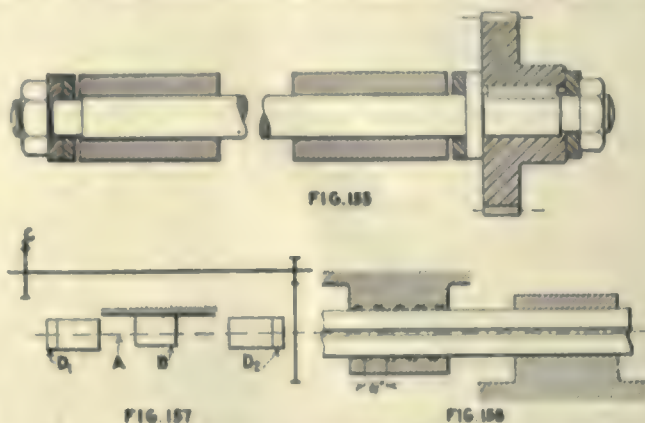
PLATE PLANNER LEAD SCREW WITH TWO THRUST BEARINGS. FIG. 157—FEED SCREW DRIVEN THROUGH SEPARATE SHAFT. FIG. 158—LEAD SCREW USED AS FEED ROD
